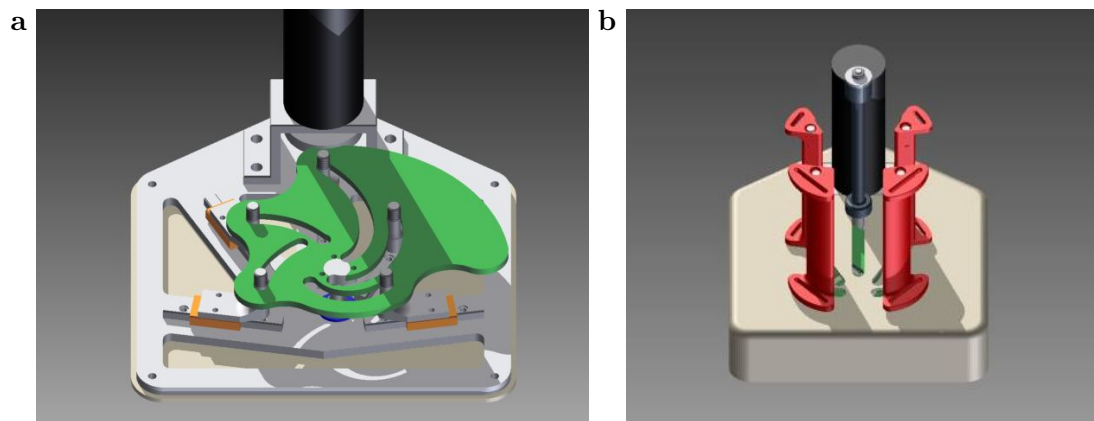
(a) Inner parts of the hand module in opened position, (b) Hand module fully assembled in open position.
